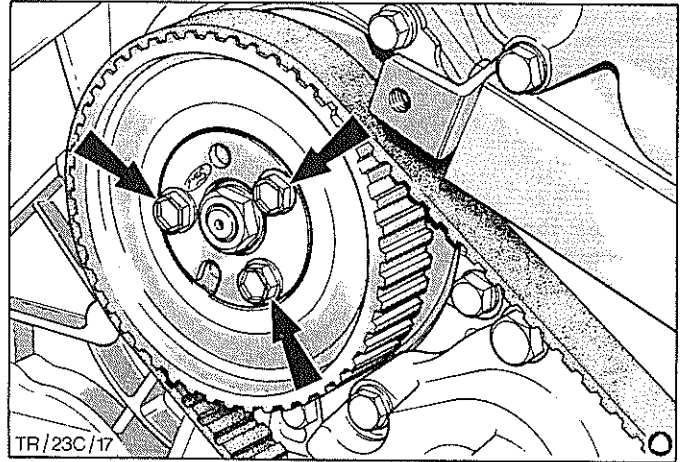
Slacken driveshaft pulley to fuel injection pump flange bolts.
